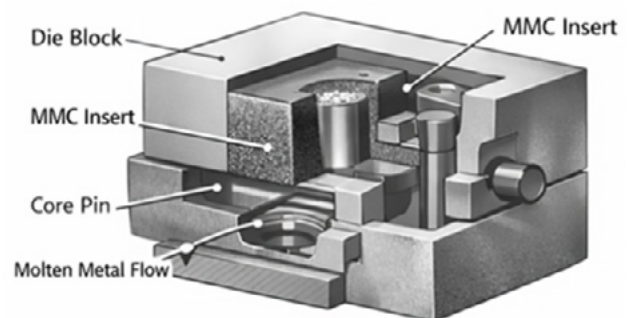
Metal Matrix composite inserts applications in die casting dies
